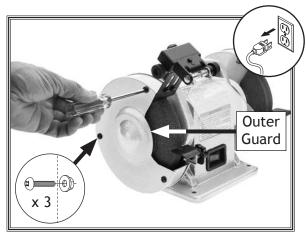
Location of outer guard hardware that must be removed when removing wheel.
